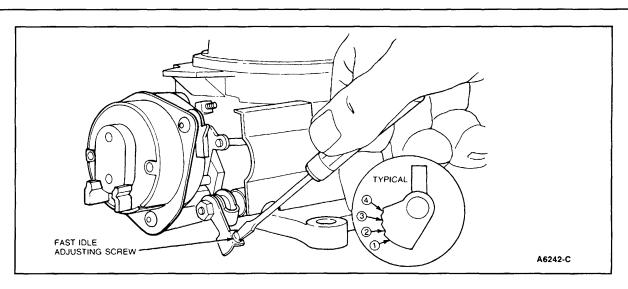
5.8L w/7200-VV Carburetor — Fast Idle RPM Adjustment
